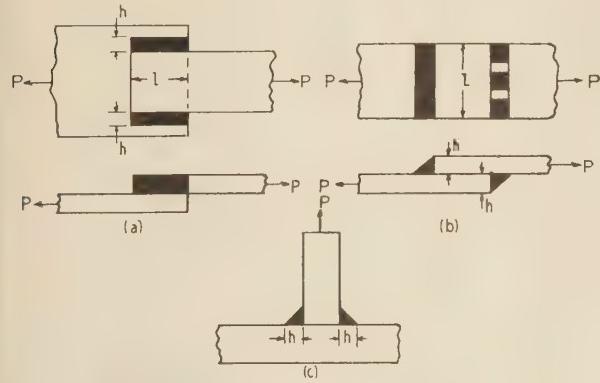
TYPICAL FILLET-WELDED JOINTS
